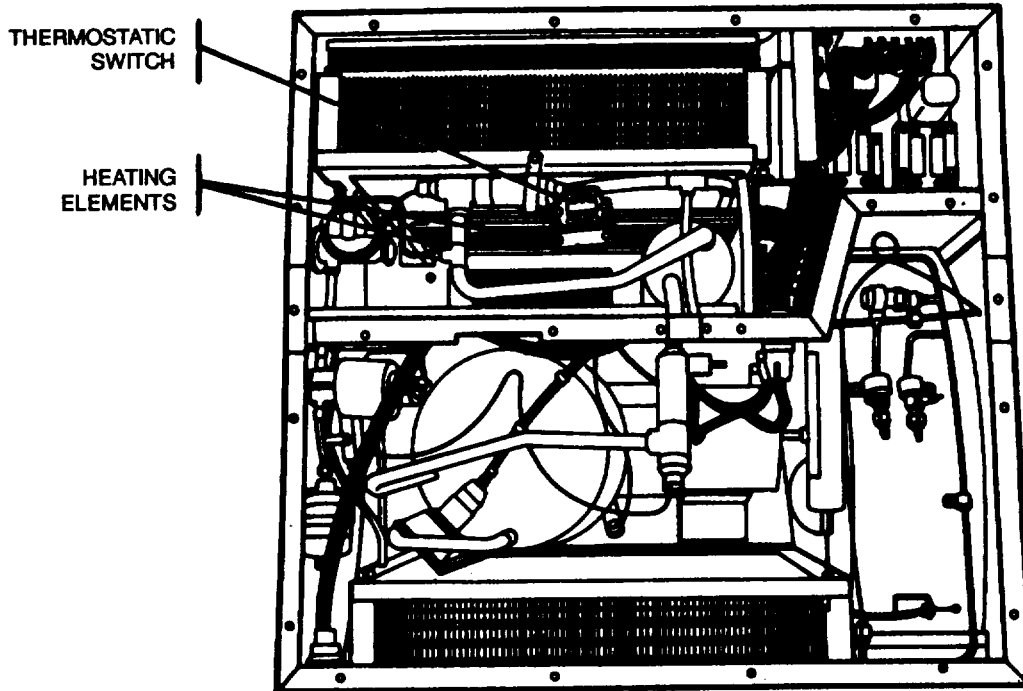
Air Conditioner, Top View, Top Covers Removed, Heating Section
